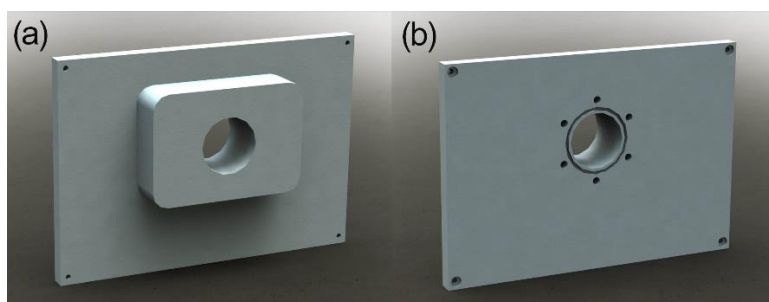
3D model of the Plexiglass back plate window, designed to couple the vacuum stage to the LTQ XL mass spectrometer: a) back side, positioned towards LTQ and b) front side, with CF40 rubber seal groove and threaded holes. Designed by A. Milosavljević et al [9].
